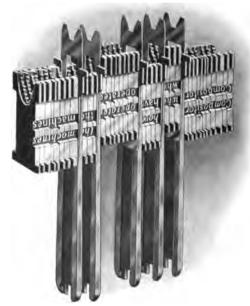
Linotype ; composed line of two-letter matrices, casting part of the line in roman and part in italic. To face page 427.]
